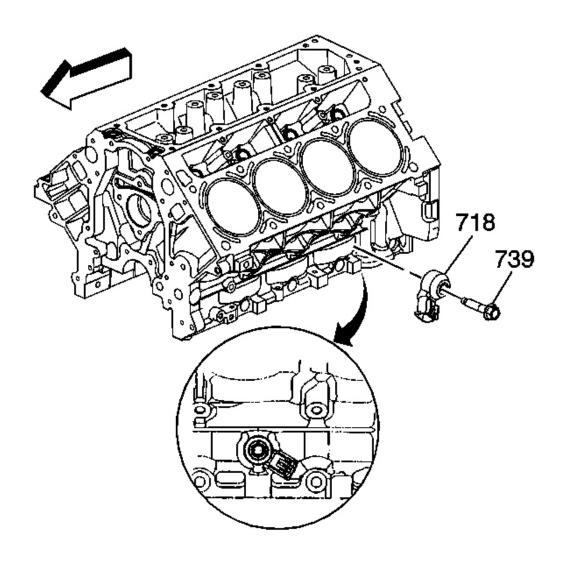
Left Side Knock Sensor & Bolt Courtesy of GENERAL MOTORS CORP.
